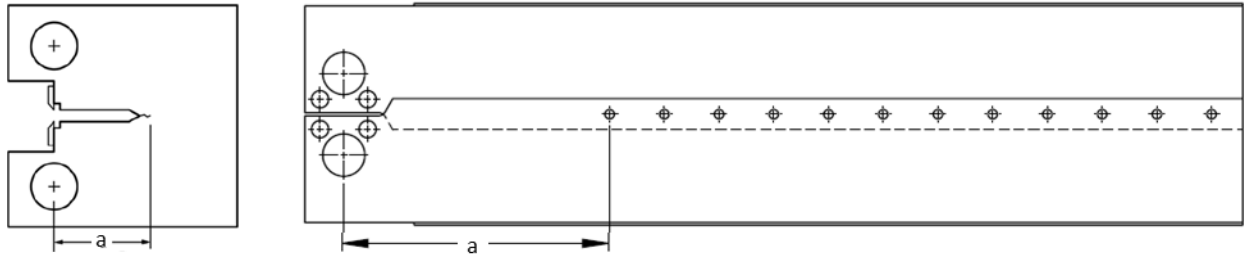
Left) Compact Tension specimen showing the updated crack size, 'a'. Adapted from ASTM E1820-15a [111]. Right) Caiman Mode III specimen drawing showing 'crack' extension measure, 'a'.
